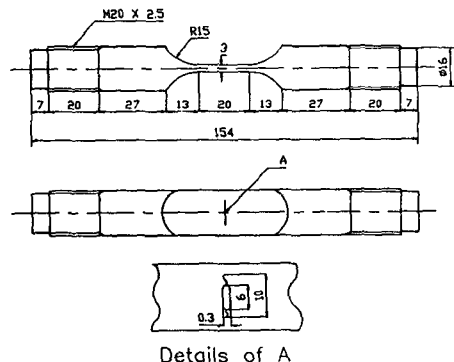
Specimen configuration and dimensions (unit ; mm)
